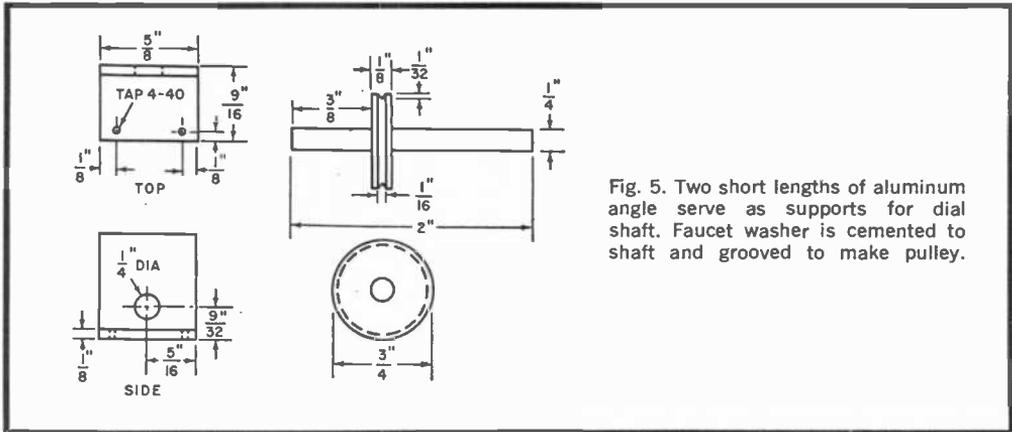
Two short lengths of aluminum angle serve as supports for dial shaft. Faucet washer is cemented to shaft and grooved to make pulley.
